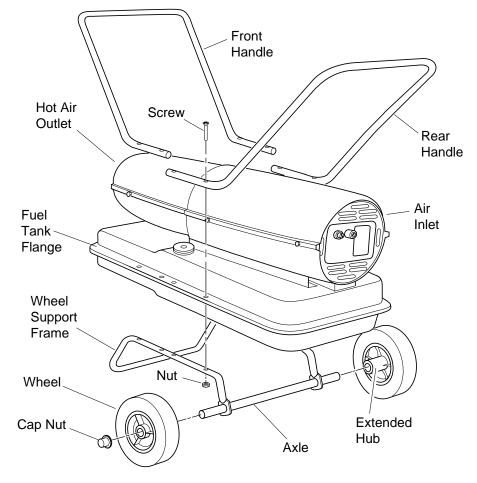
Wheel and Handle Assembly, 26,4/44 kW (90/150,000 BTU/Hr Models) Only
